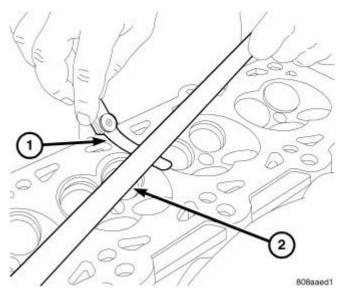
Checking Cylinder Head Flatness Courtesy of CHRYSLER LLC
